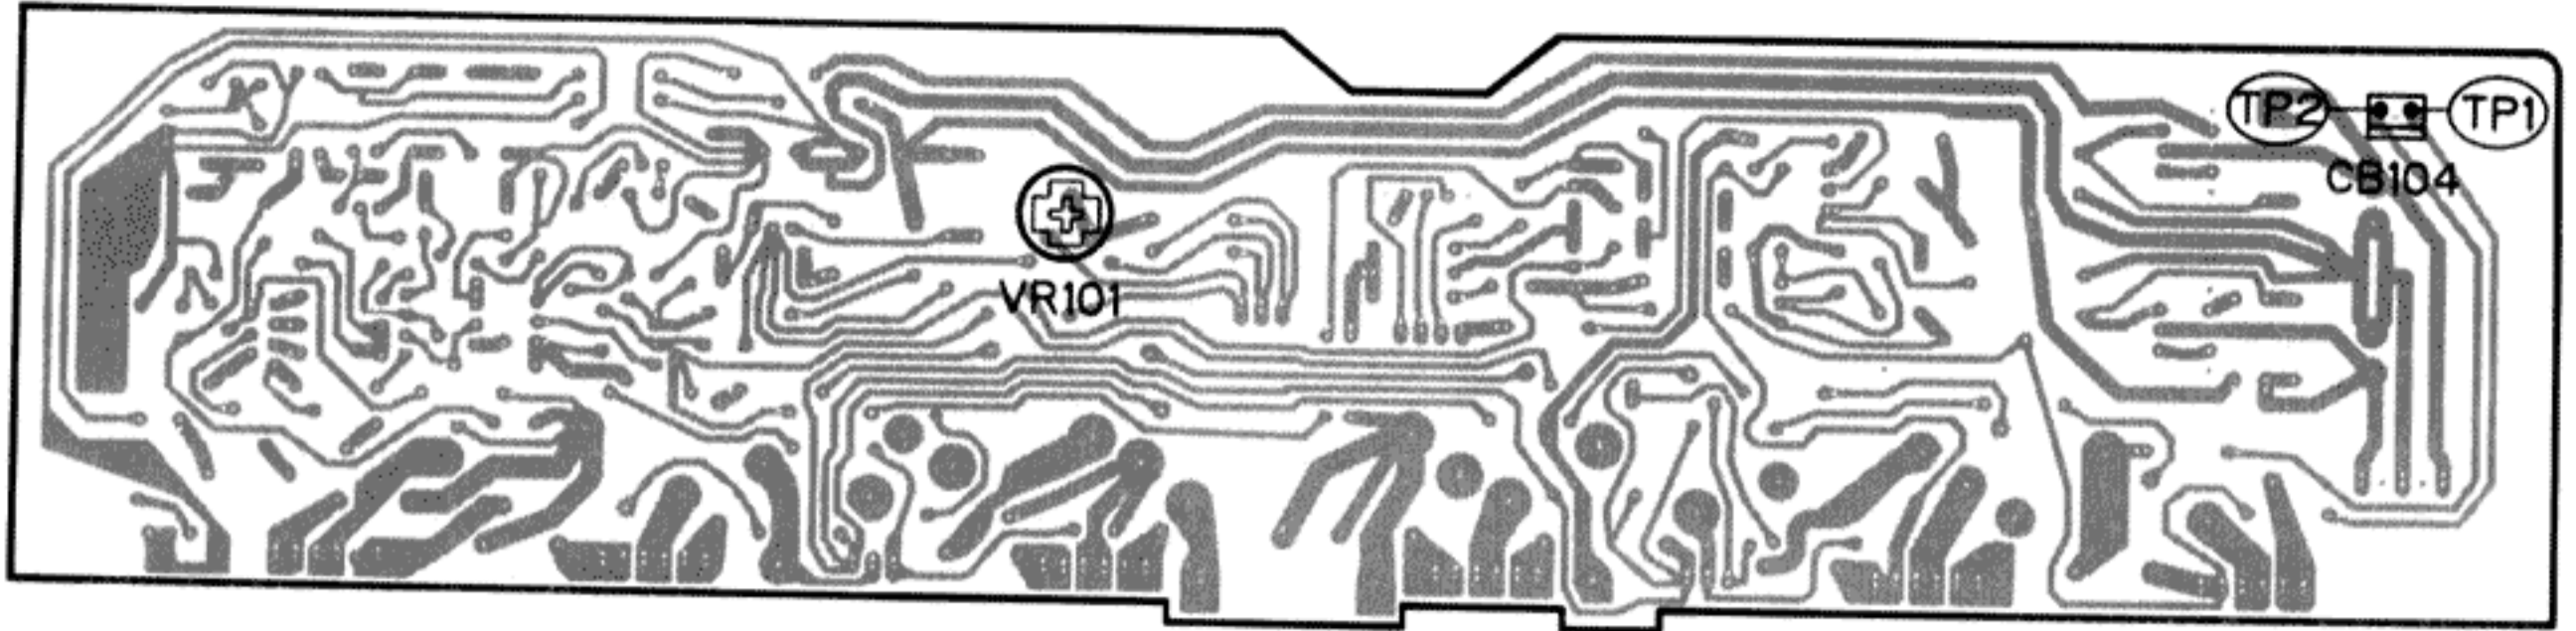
Main-Amp(L) P.C. Board(Component Side)
